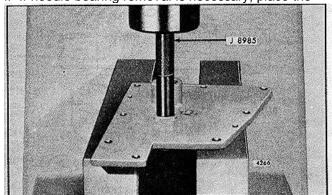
Removing Stop Lever Shaft Bearing or Bushings from Governor Cover using Tool J 8985
